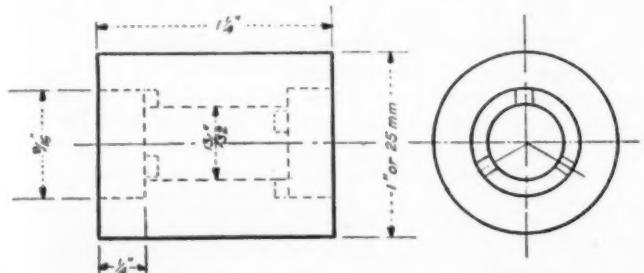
DIMENSION SKETCH OF STEEL CYLINDER
